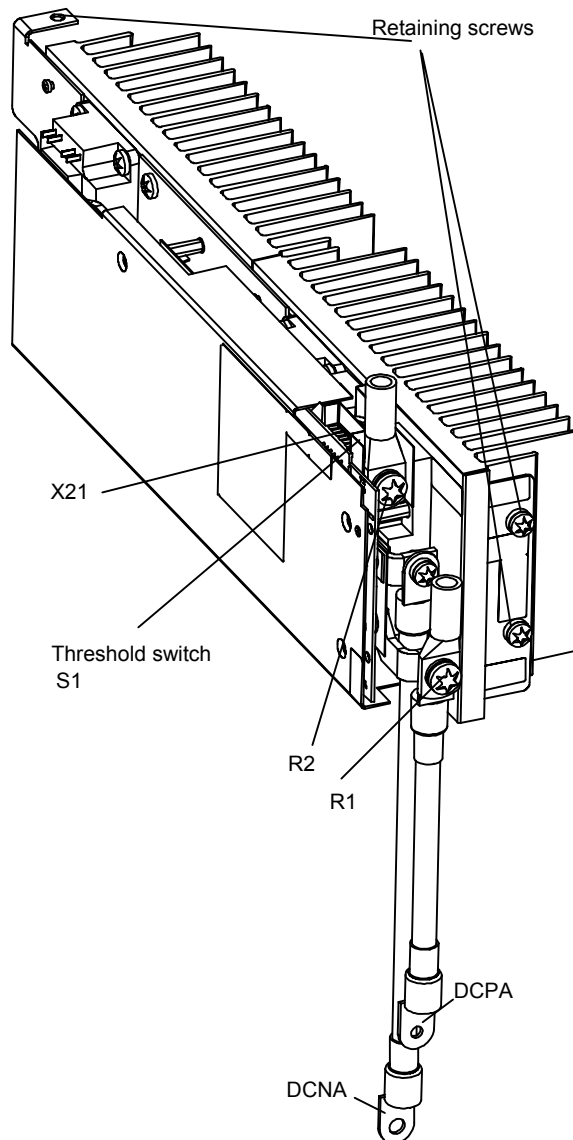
Braking Module for Active Line Module / Motor Module (type GX)
